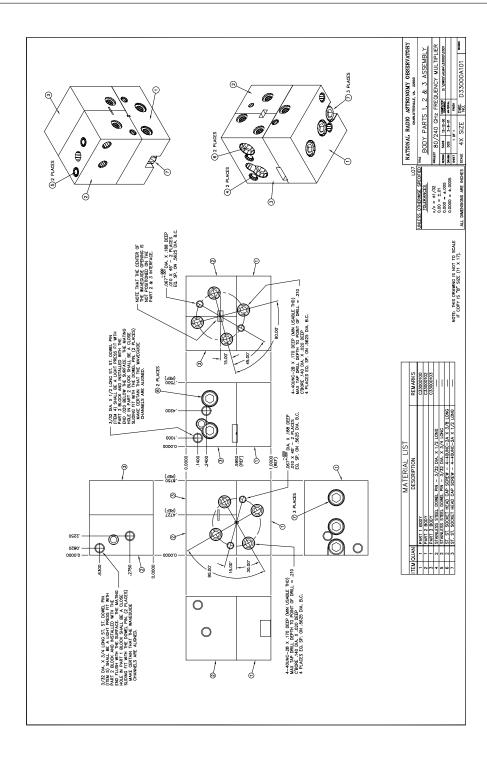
80/240 GHz frequency tripler, version 1: External mechanical assembly of parts 1, 2 and 3 comprising the metal block.
